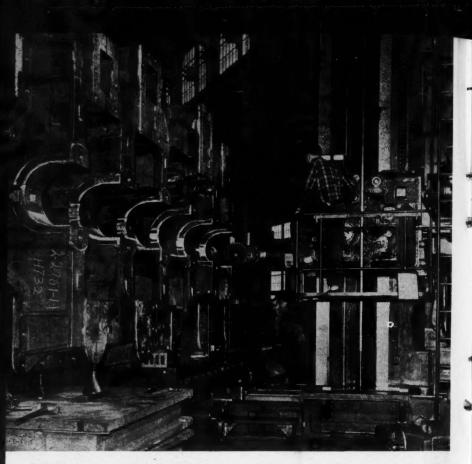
Machining Main Bearings for Crankshaft in Vickers Engine Bedplate. The Machine is a Giddings & Lewis Horizontal Boring Machine
